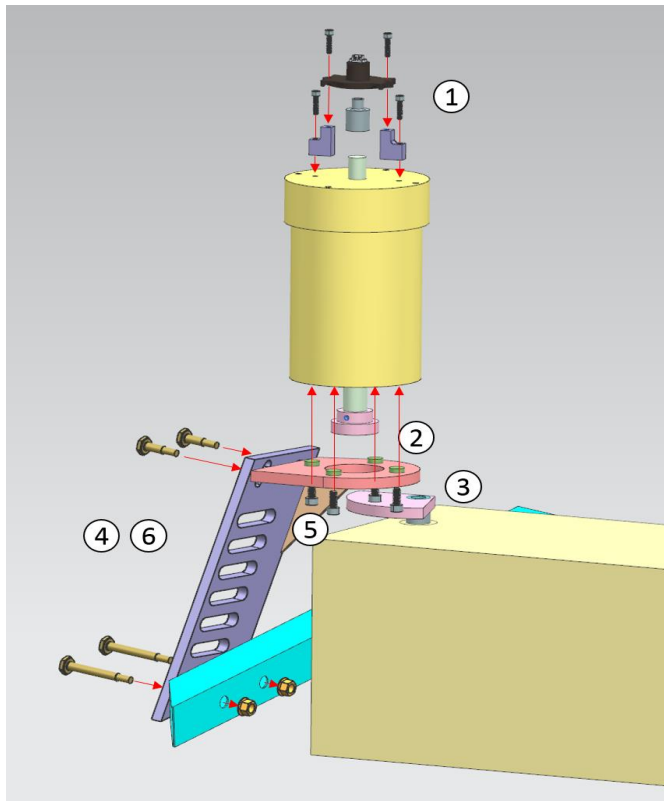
Shows the overall assembly view with step numbers and the instruction for each step is show below.
